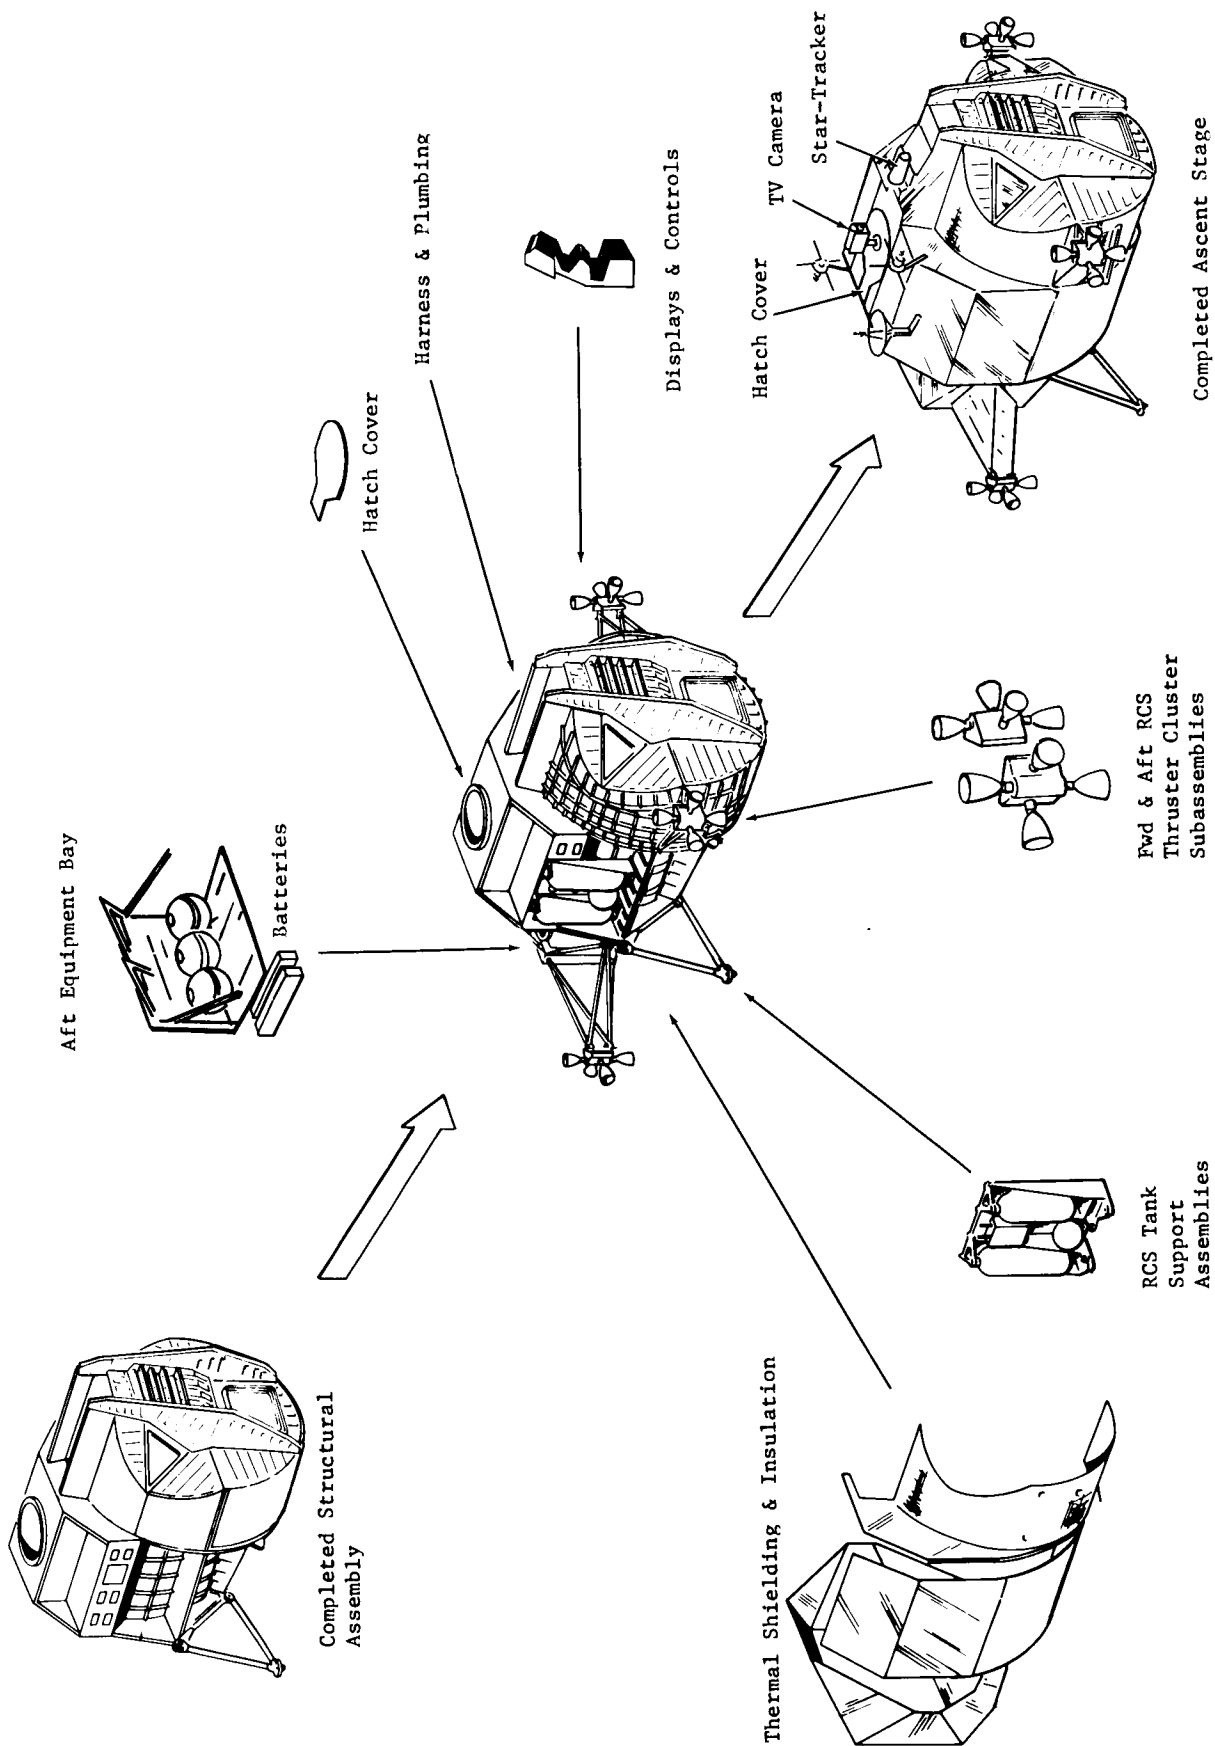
Final Assembly Flow - LEM Shelter "1" Ascent Stage
